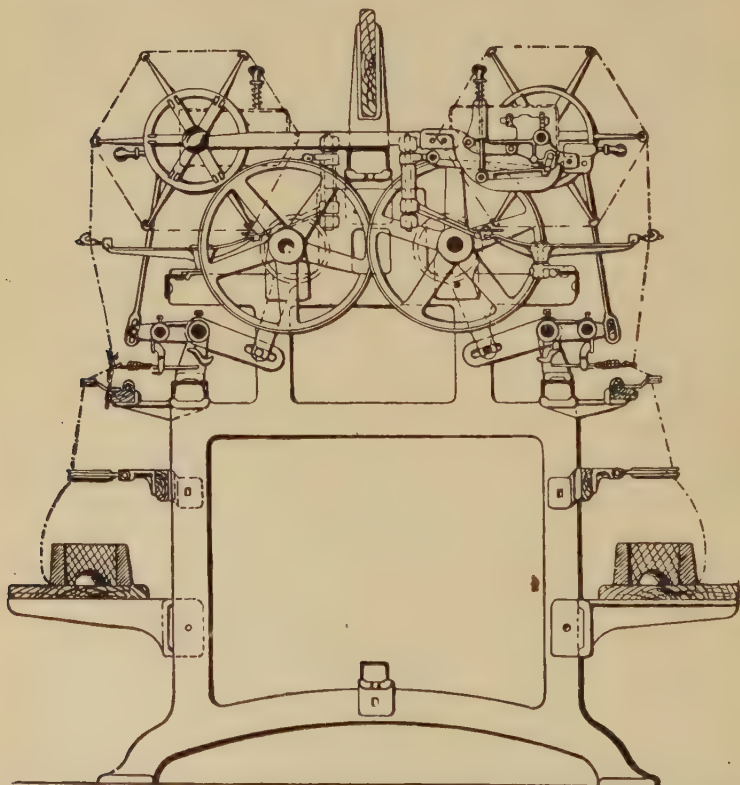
Side Elevation of Reeling Machine (from Cake). (Courtesy C. G. Haubold A. G., Chemnitz.)
